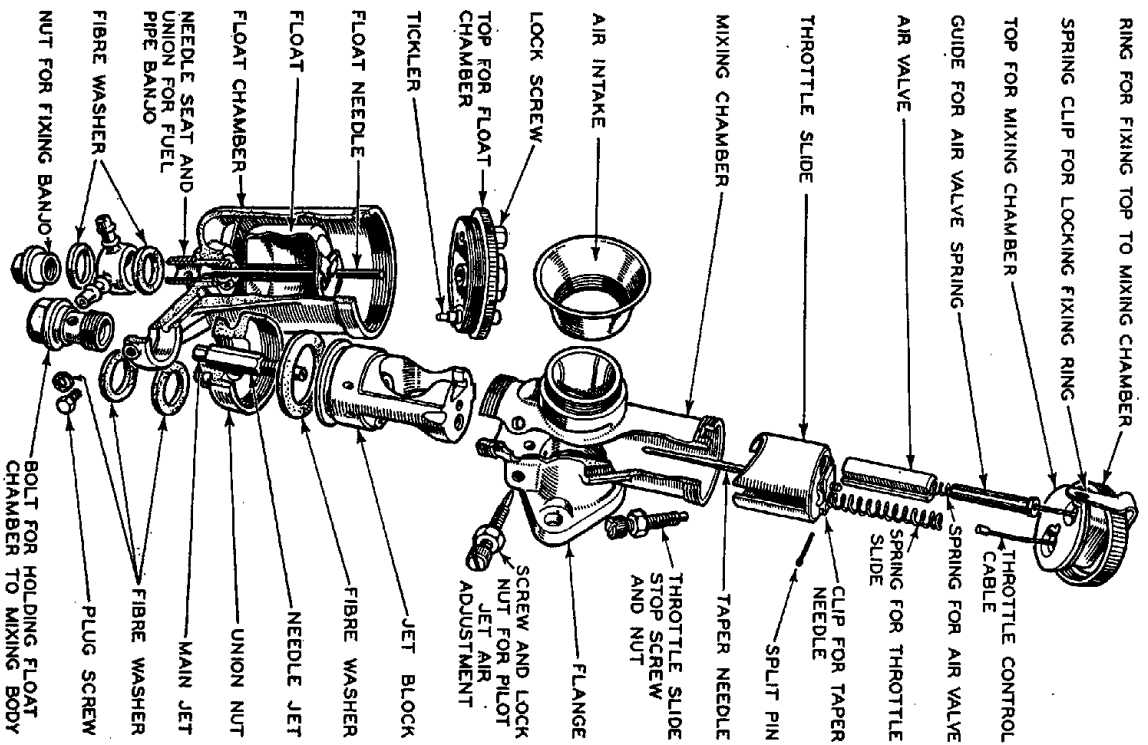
EXPLODED VIEW OF AMAL TYPE 76 CARBURETTER.
